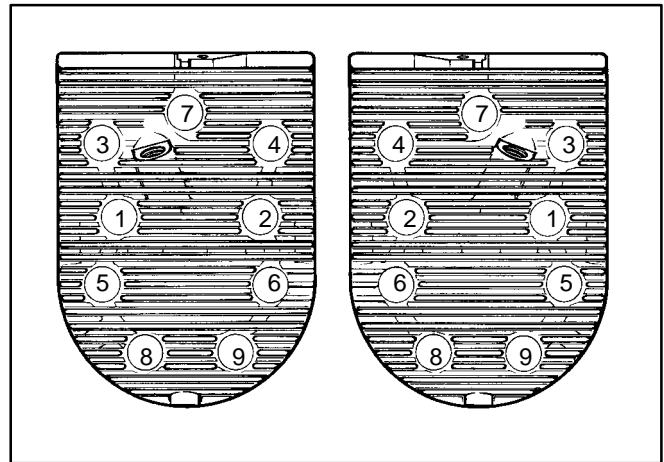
MODEL BGD CYLINDER HEAD BOLT TORQUE SEQUENCE
